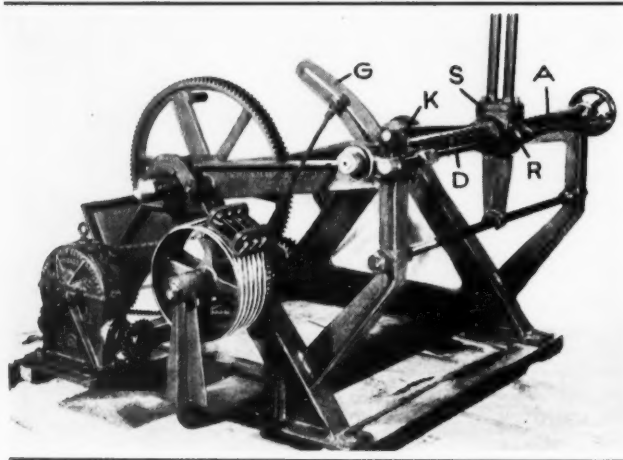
Machine for Evenly Distributing Wire or Cord on Spool 50 Inches in Diameter
